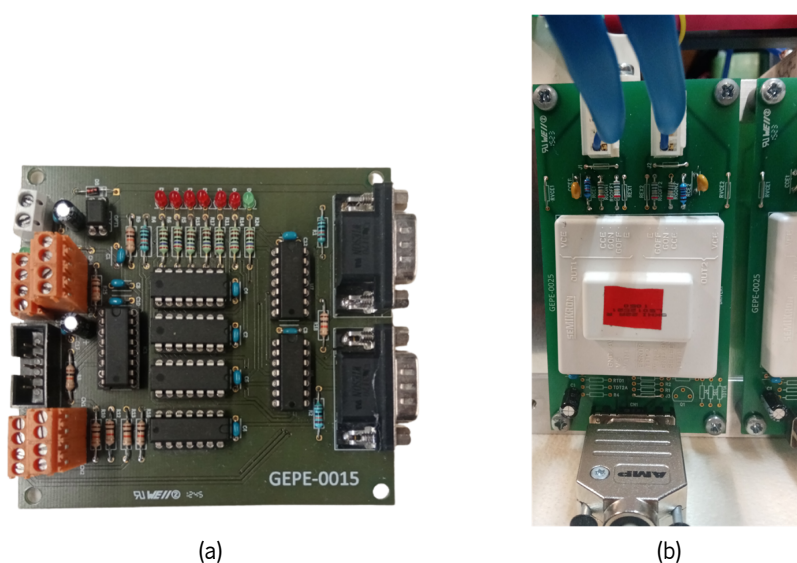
Command and driver boards utilized for the motor control system: (a) GEPE-0015 command board; (b) GEPE-0025 main driver board with the integrated SKH122AH4 driver.
